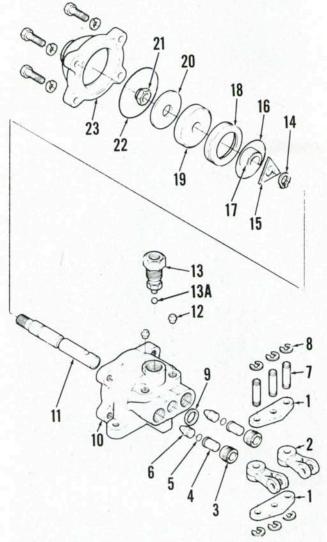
Exploded view of power brake valve used on Model TW-35.
